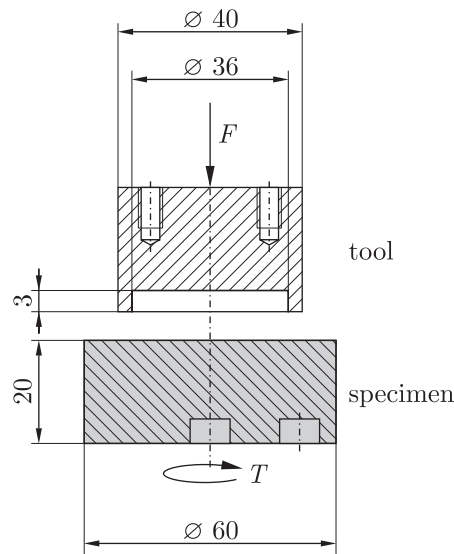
The toolkit used in the preliminary cold forging tests.
